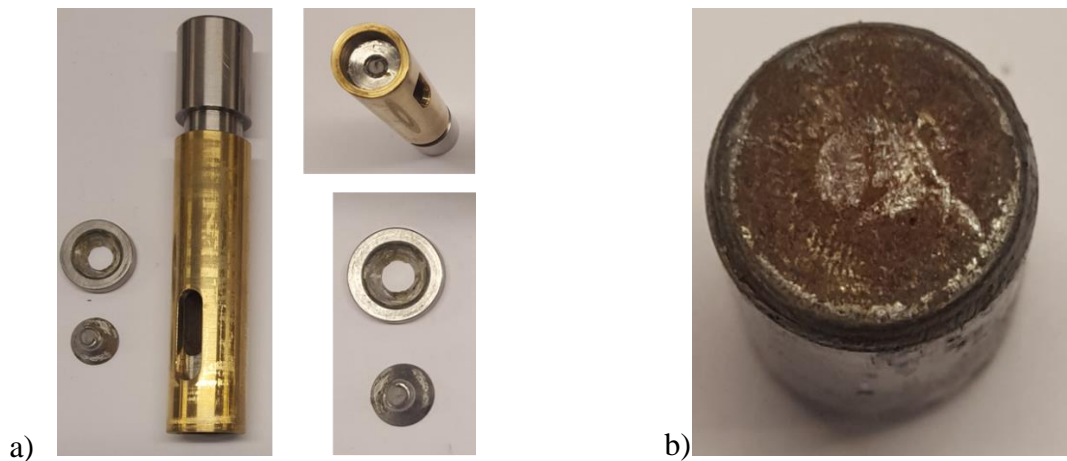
a) Signs of galvanic corrosion of the BraCyl fastener b) corrosion of the central dowel pin for the SteSq prototype.
